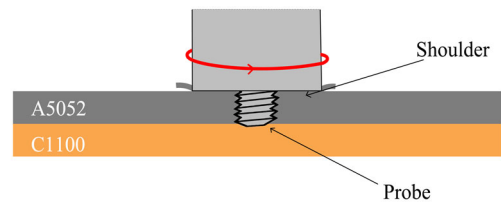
Schematic diagram of friction stir spot welding in this study.
